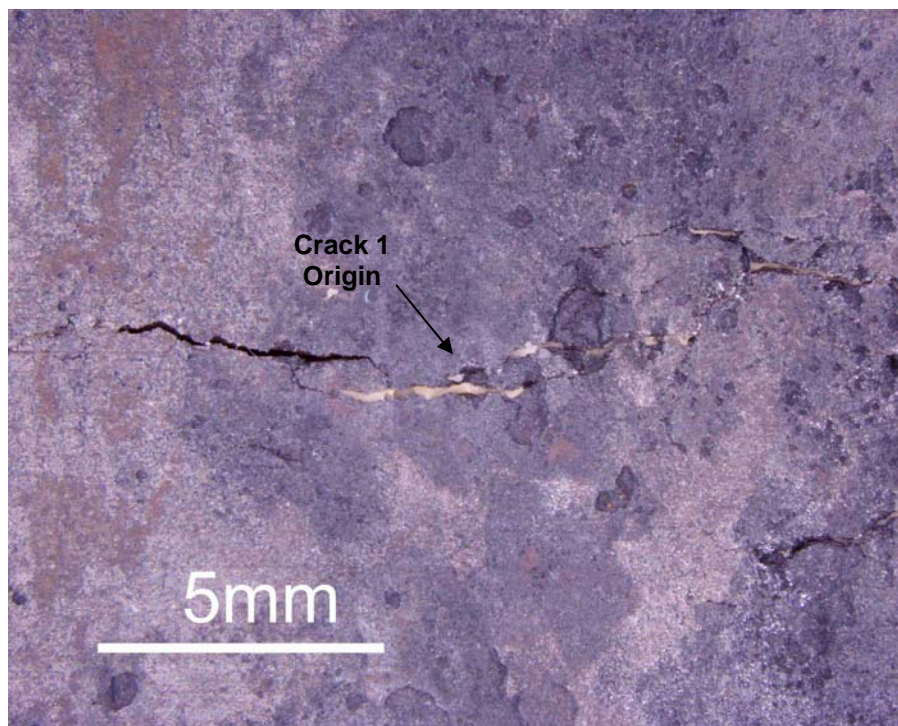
Fatigue Crack on Corroded Inner Surface of Shank PT0099
